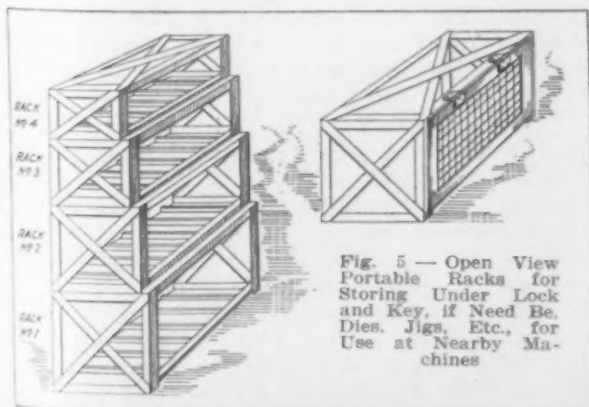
Open View Portable Racks for Storing Under Lock and Key, if Need Be, Dies, Jigs, Etc., for Use at Nearby Machines
